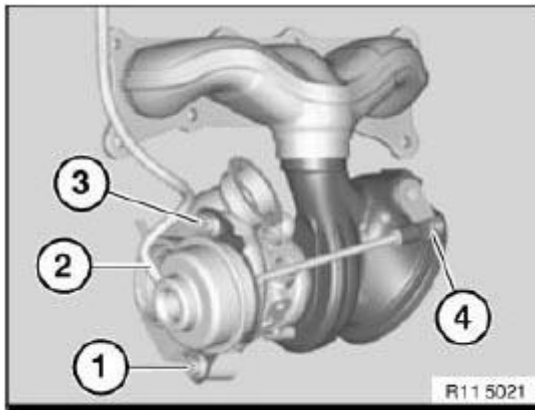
Identifying Screws, Vacuum Hose And Locking Clip
